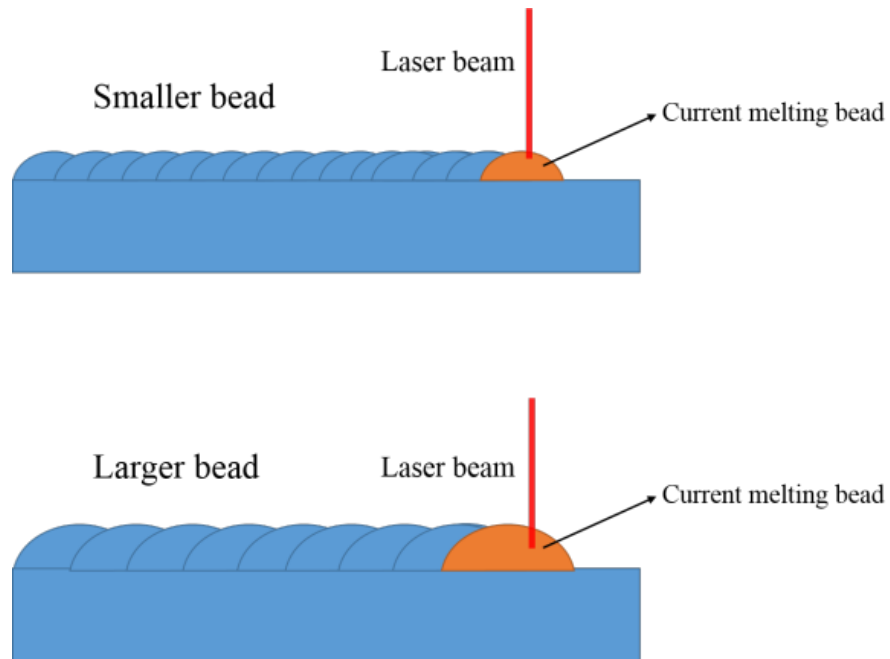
Part surface roughness with different melting bead sizes. Parts made with smaller beads have finer surfaces.
